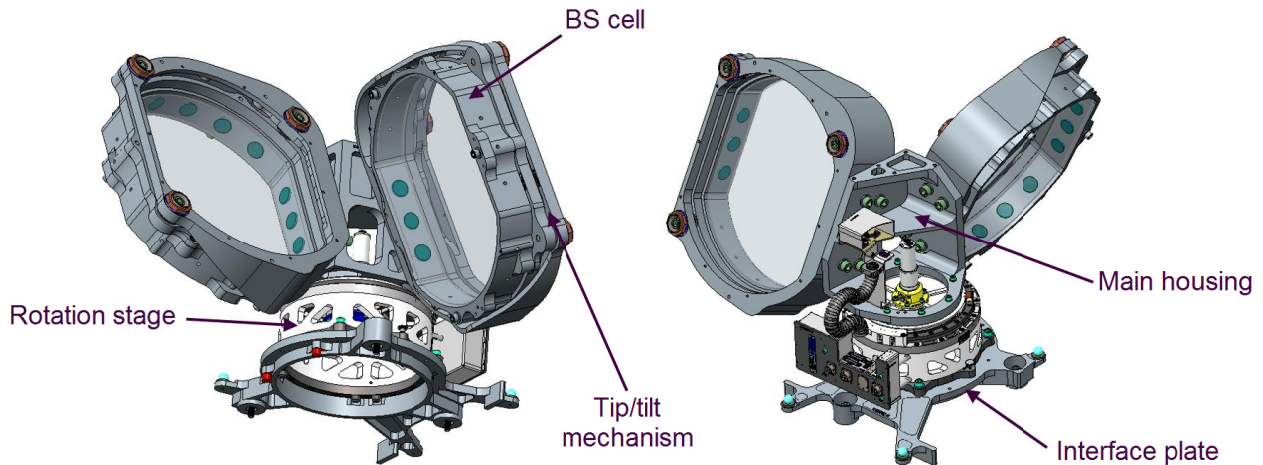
Science & engineering beamsplitter changer mechanism assembly.
